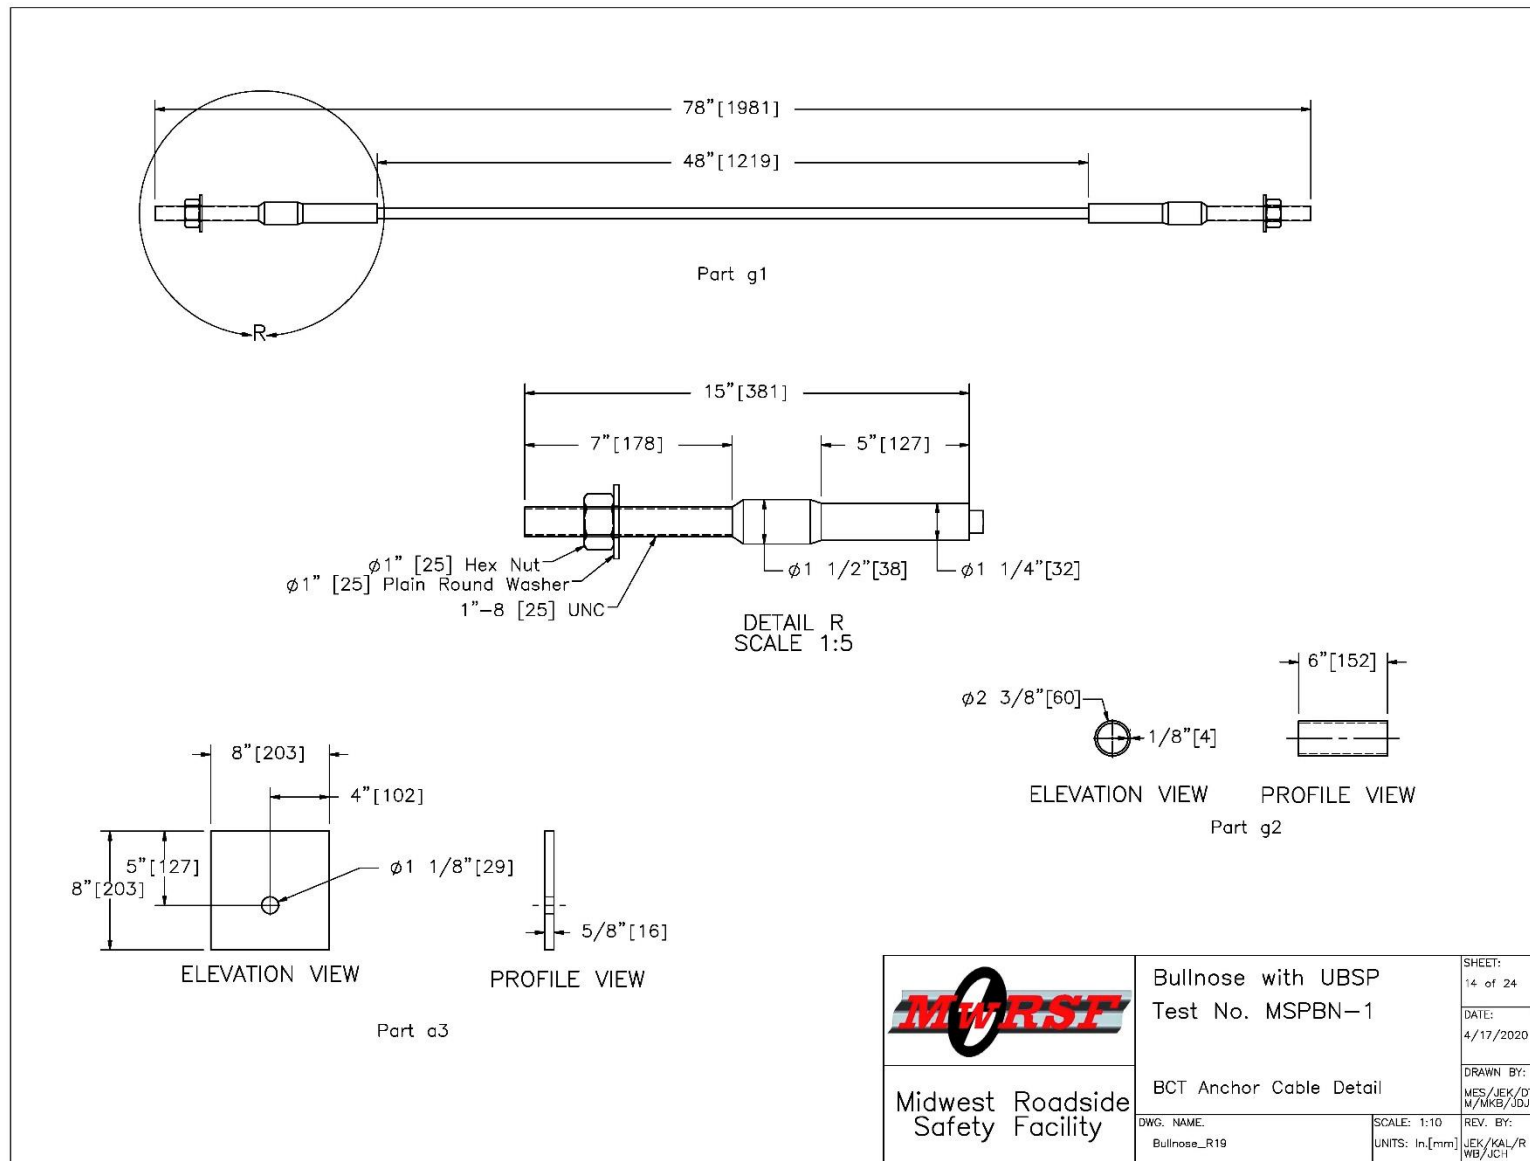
BCT Anchor Cable Detail, Test Nos. MSPBN-1 through MSPBN-3
